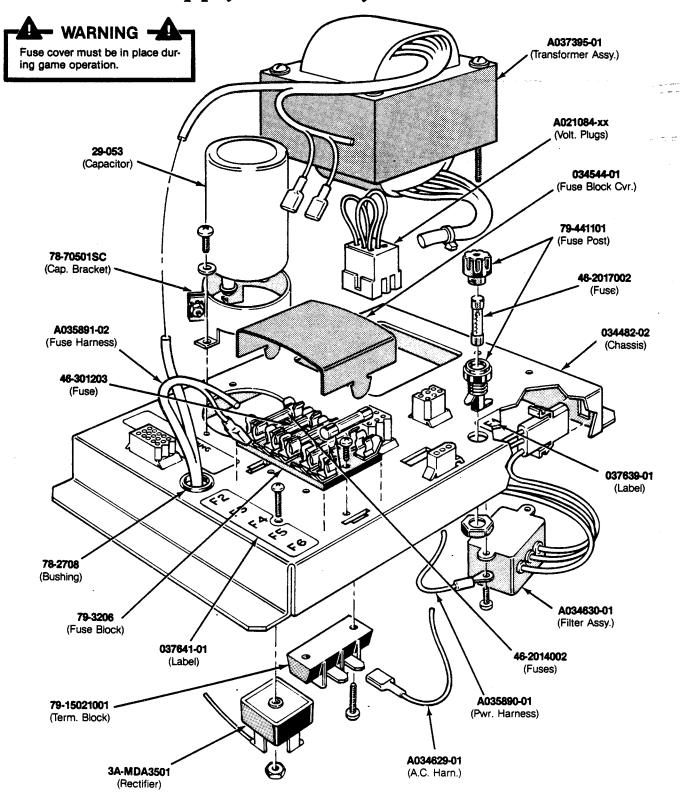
Color X-Y Power Supply Assembly A037396-xx D
